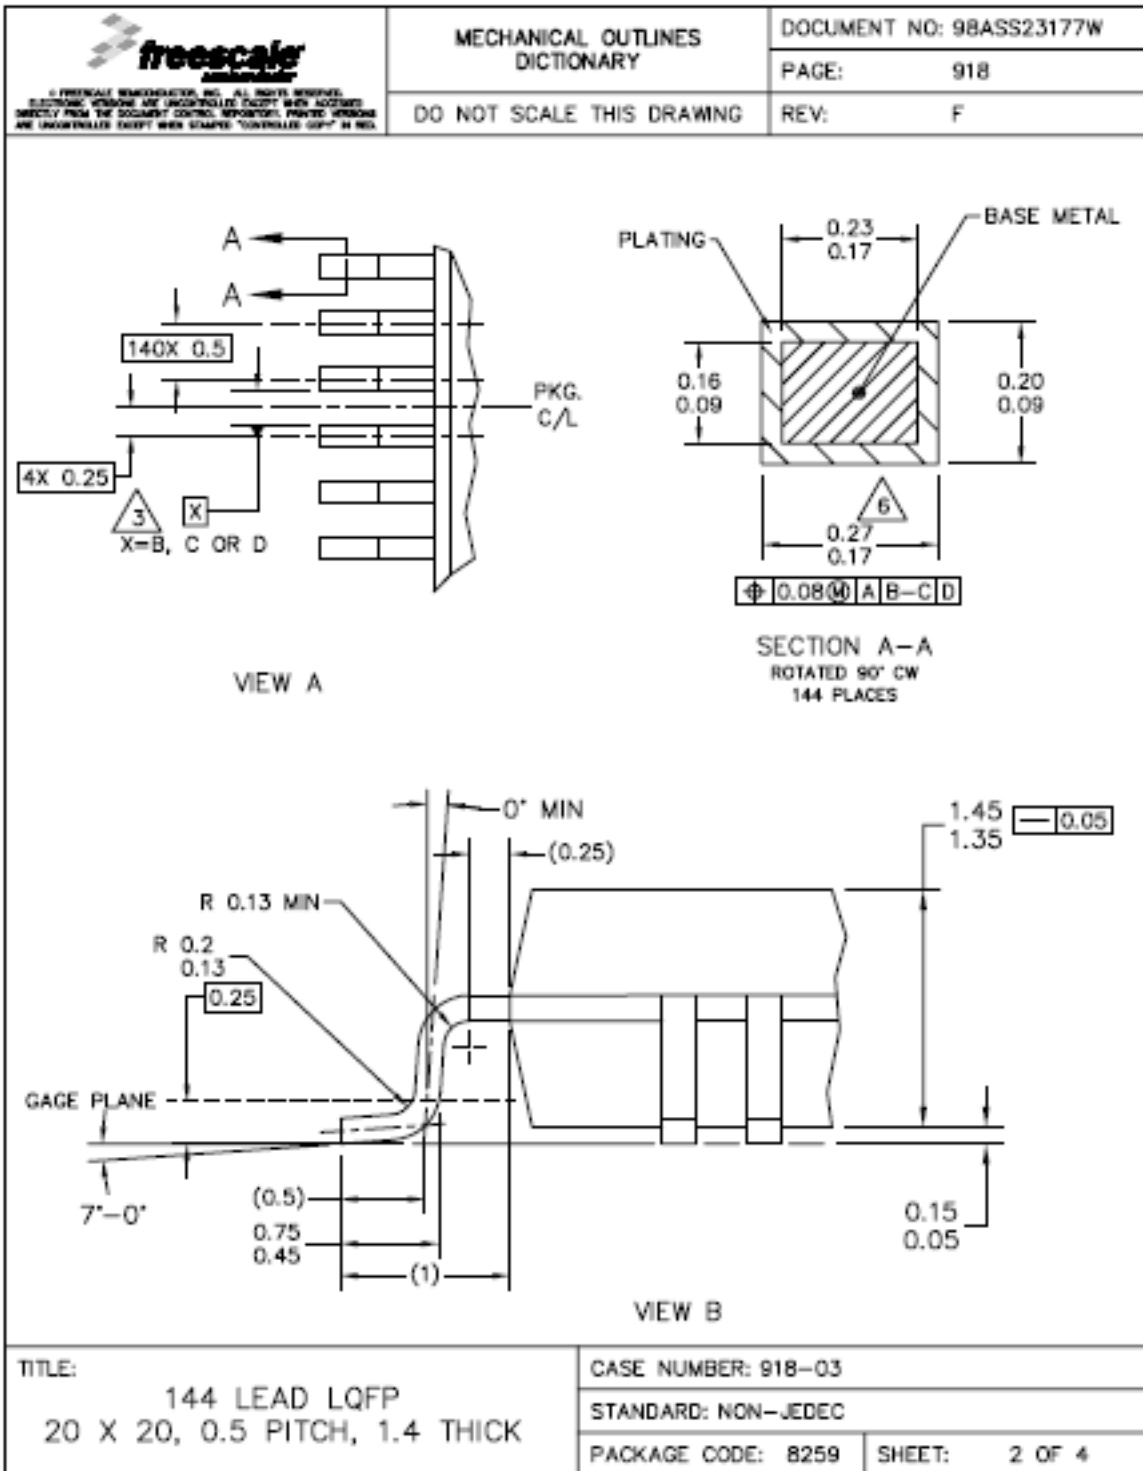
144-Pin Package Outline Drawing (2 of 4)
